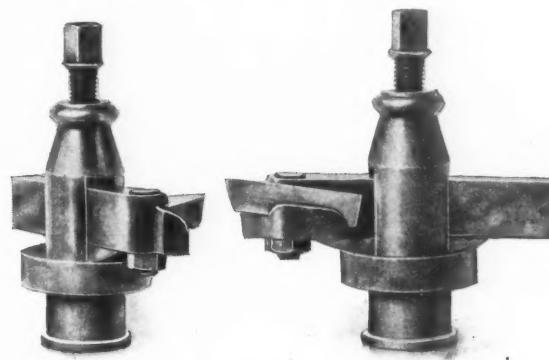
A Simple and Rigid Tool-holder, using a Blade of Triangular Section
